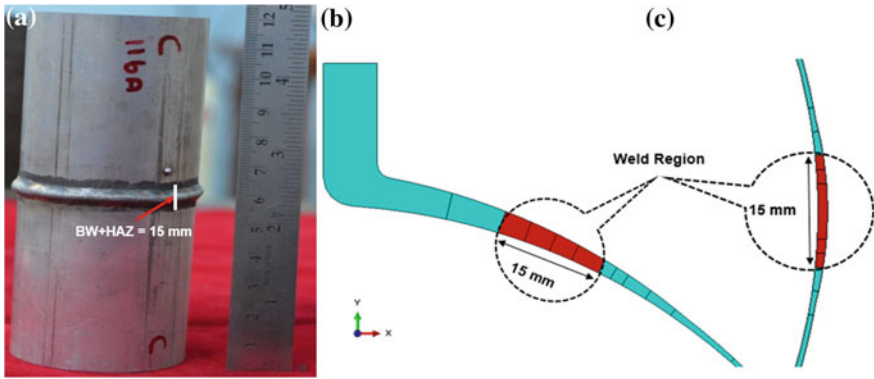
Weld bead and HAZ measurement in CMT weld AA 6061-T6 pipe specimen (Left) and Weld region assignment in the FE modelled liner (Right)
